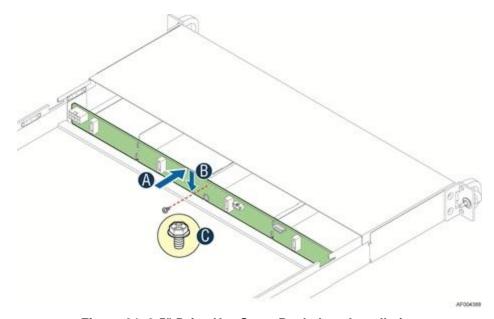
3.5" Drive Hot-Swap Backplane Installation
